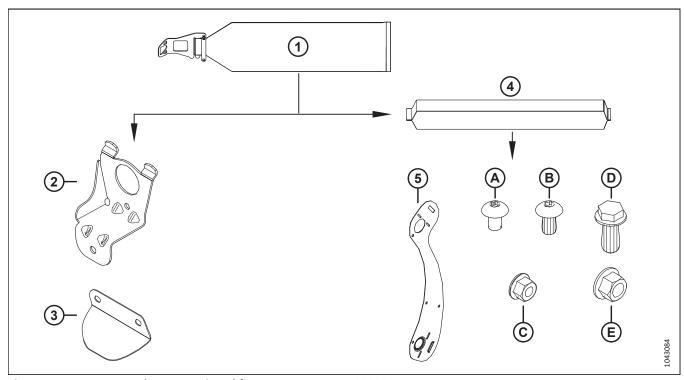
Center Reel Parts Retrieved from Parts Bag MD #368325
